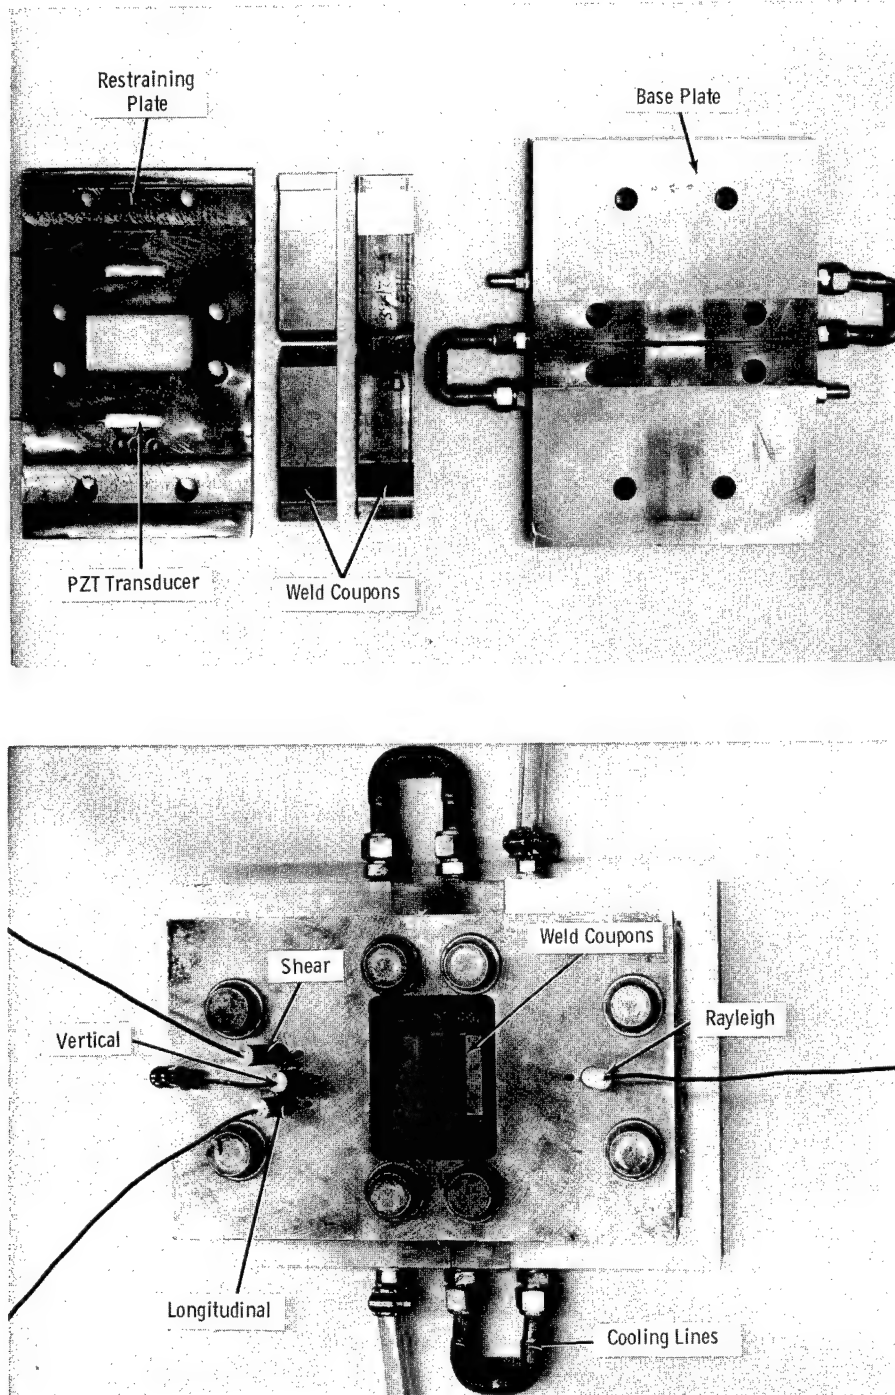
Weld Coupon (Material 304L and 316 Stainless Steel)
